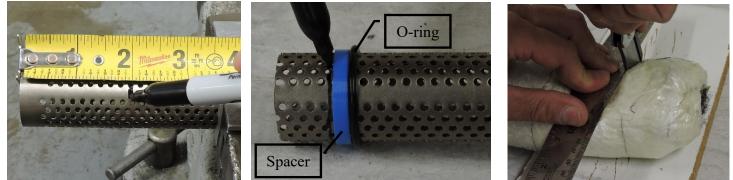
Perforated Tube rough cut mark. Figure 5 – Perforated Tube final cut marking. Figure 6 – Box knife cutting of Packing.
